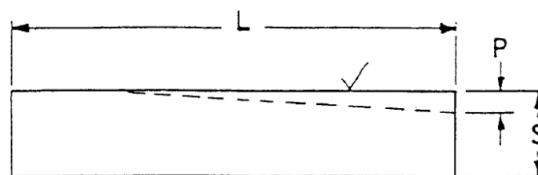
INTERRUPTED SURFACES TOLERANCE MEASUREMENTS
